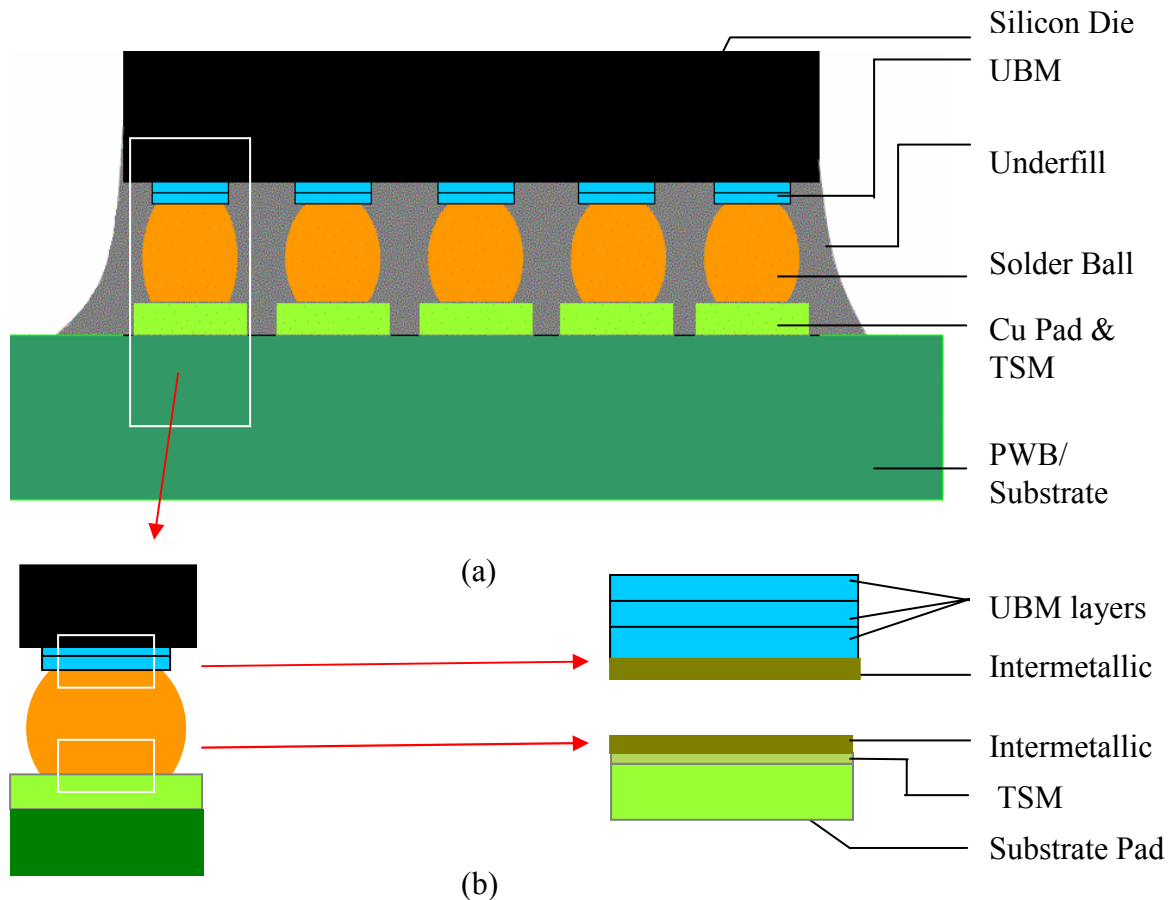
Flip-chip on Board. (a) Cross Section (b) Enlarged view of die/solder and solder/PWB interface
